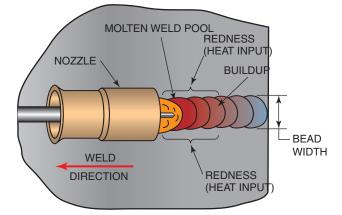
Watch the trailing edge of the molten weld pool.
